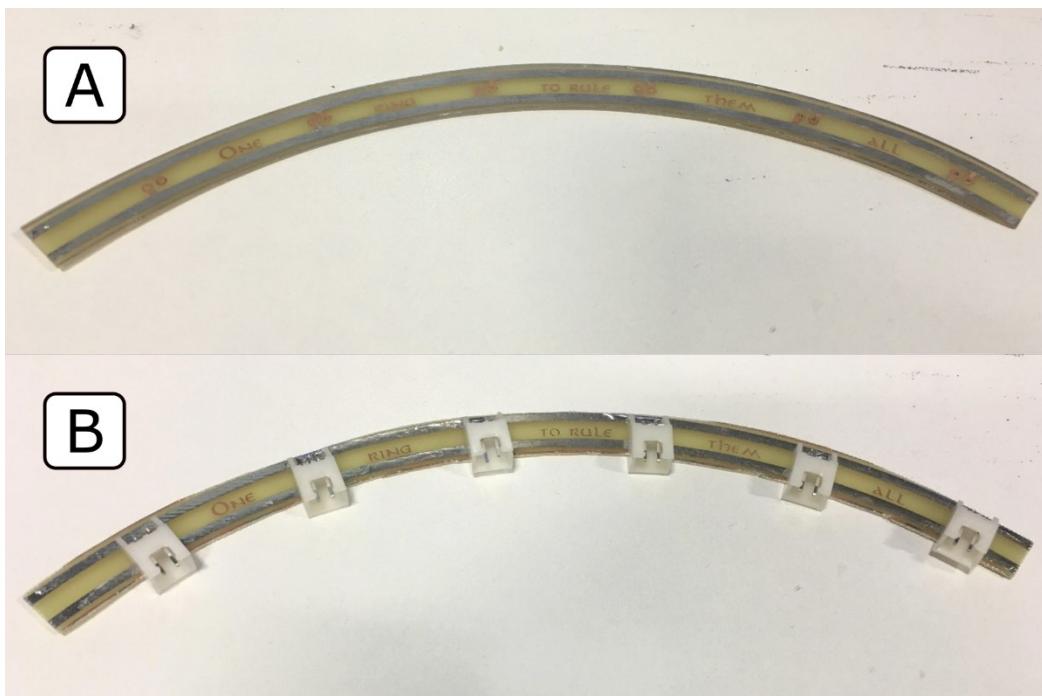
$\frac{1}{4}$ piece PCBs. A) Board cut, tinned and drilled B) JST housing soldered to the board
